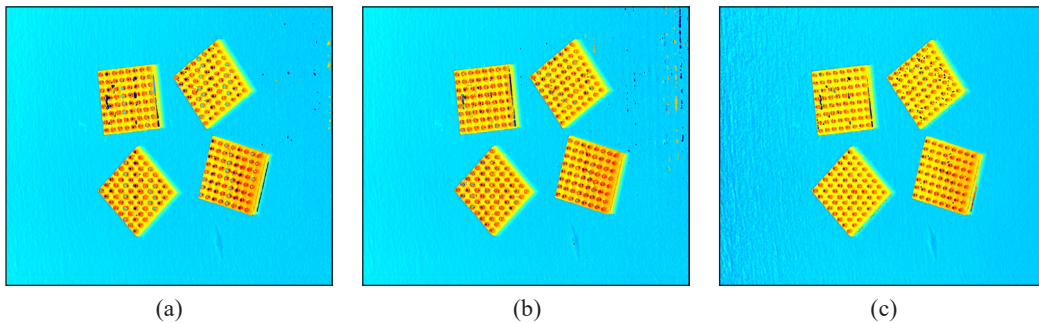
3D reconstruction of solder ball grid (a) Three-step phase shifting (b) Jiang’s HDR method (c) Proposed HDR method
